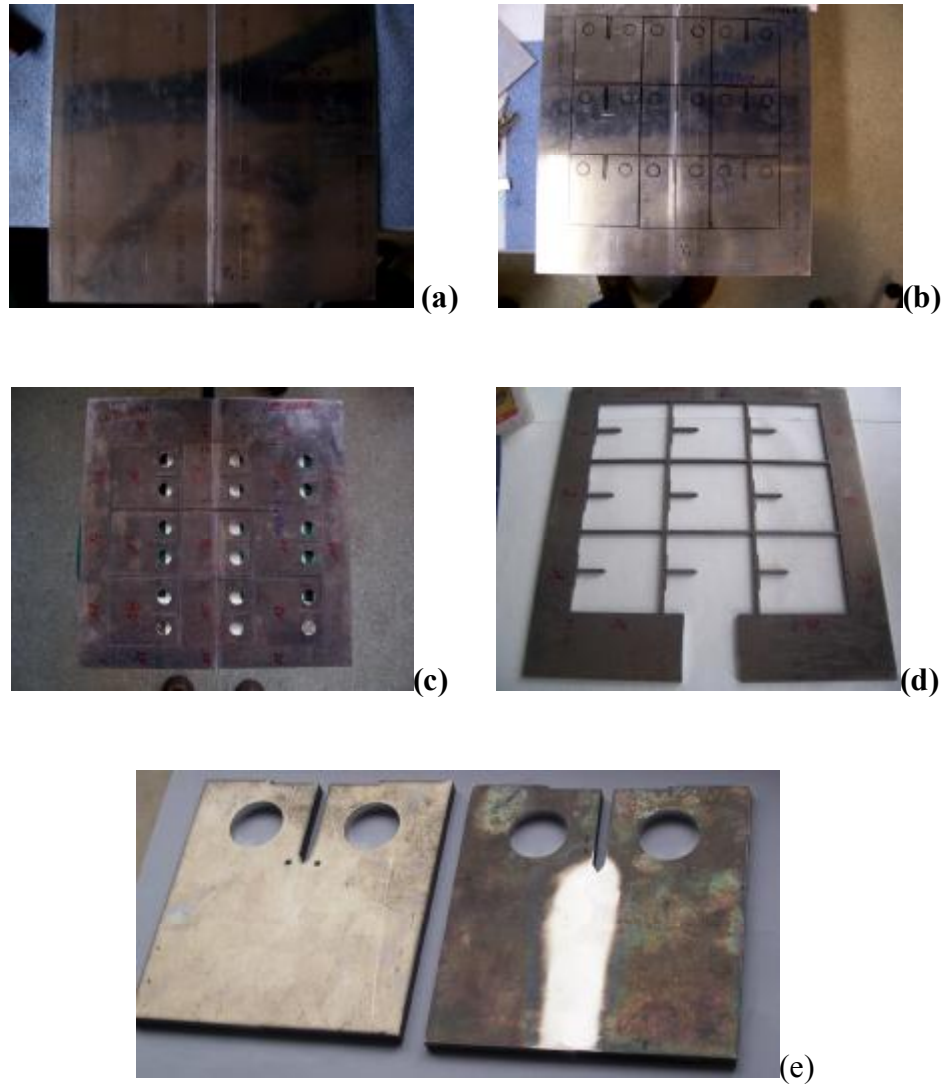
AA 6056 Aluminum plates joined with CO₂ laser beam welding
